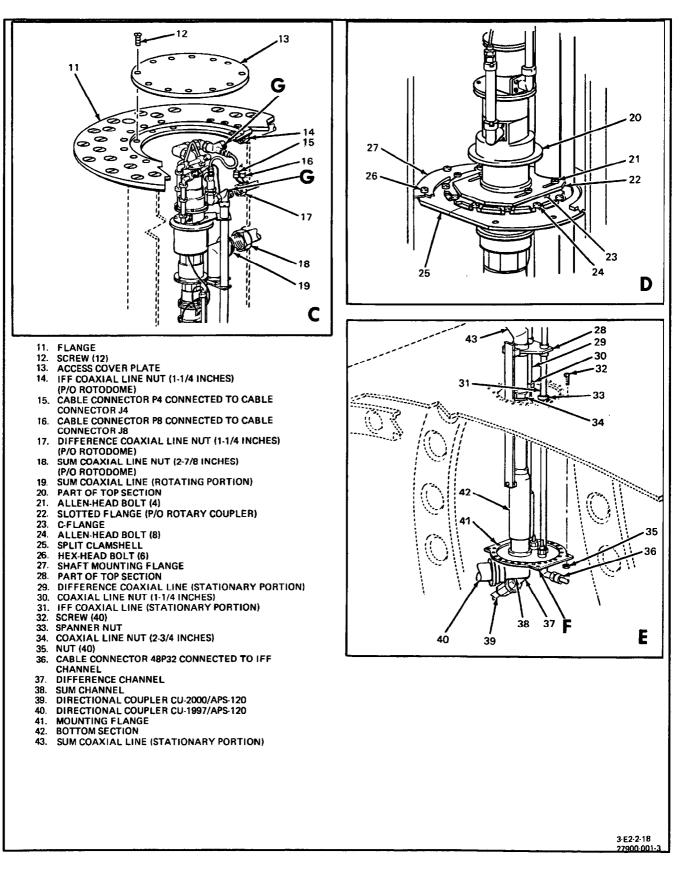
Removal and Installation of Radio Frequency Rotary Coupler CU-2287/A (Sheet 3)
